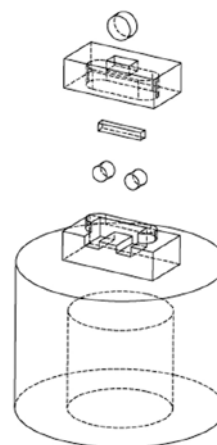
Schematic of a medium-temperature-capable fixture fabricated for bend strength testing of thermoelectric materials.
